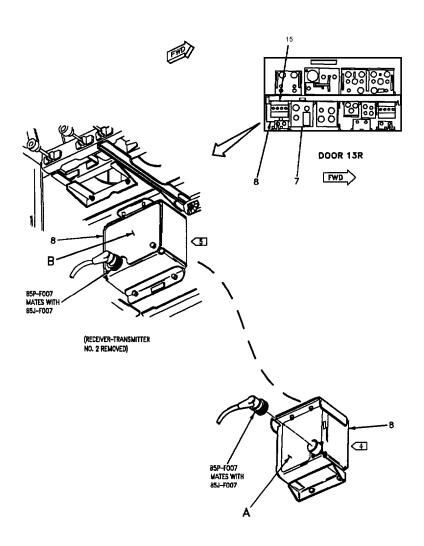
Electrical Boresight Compensation System Locator (Sheet 2)
